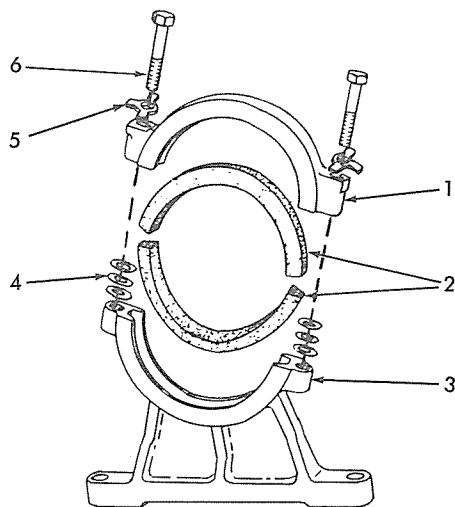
Engine Front Mounting Bracket (Used on Track-Type Tractors and Tractor Loaders) (T-71017)
